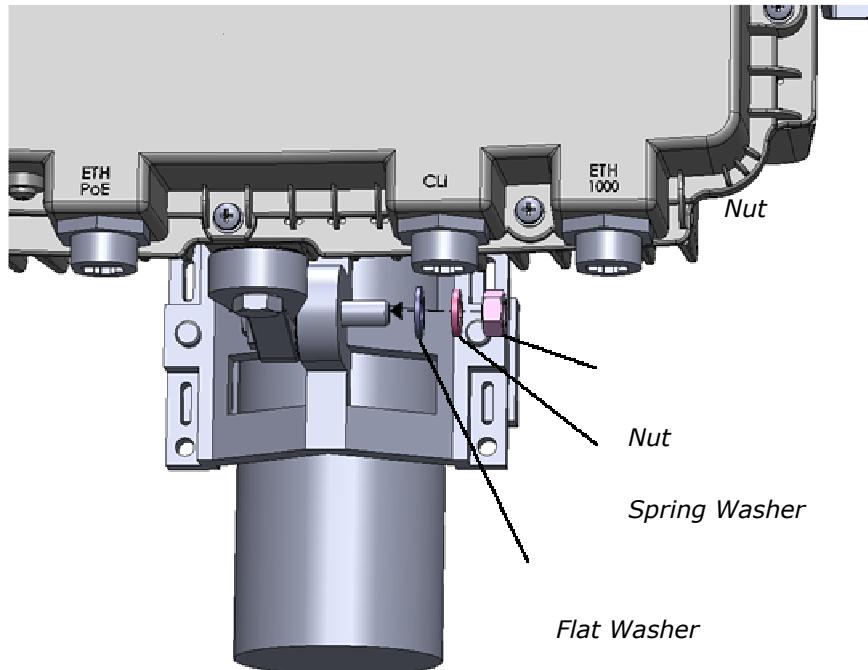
GoBeam 6100 Unit Vertical Pole Mounting
